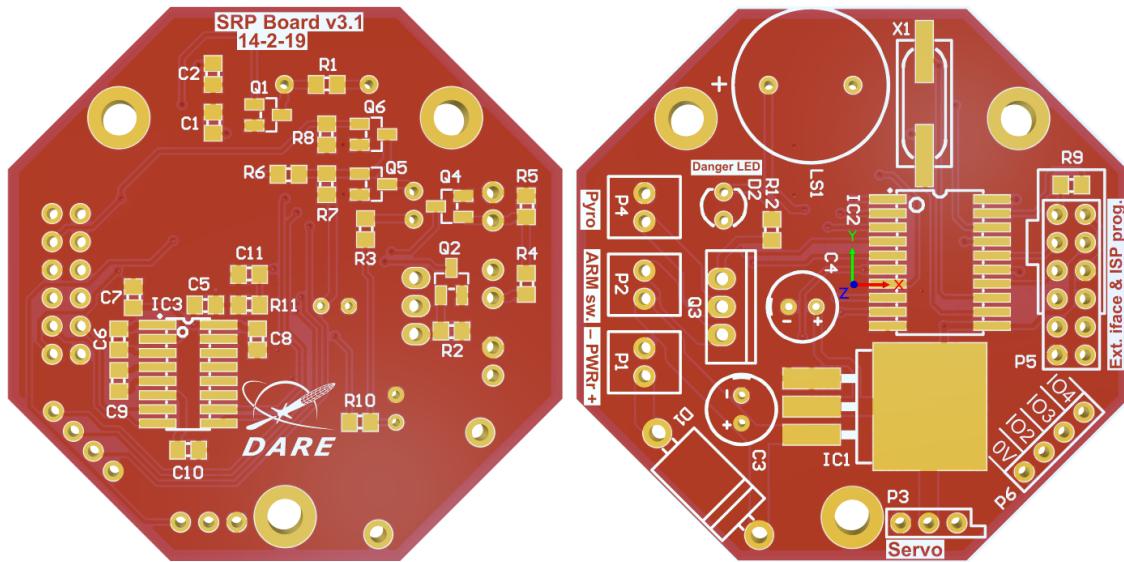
Bottom and top side of a bare SRP PCB. The date will vary, but the DARE logo is on the latest version only.
